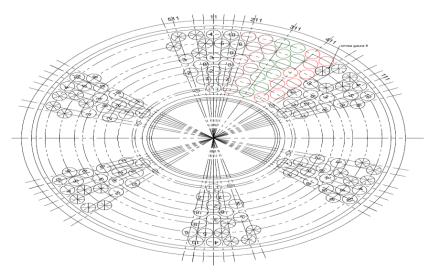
Layout of 10 pipe sectors on the tubular plate
